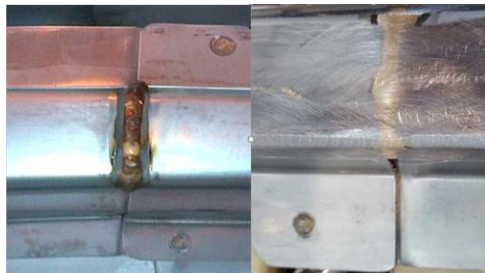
Weld beam. Left: Raw humping weld beam to be deburred and polished. Right Weld beam surface being deburred and polished.
